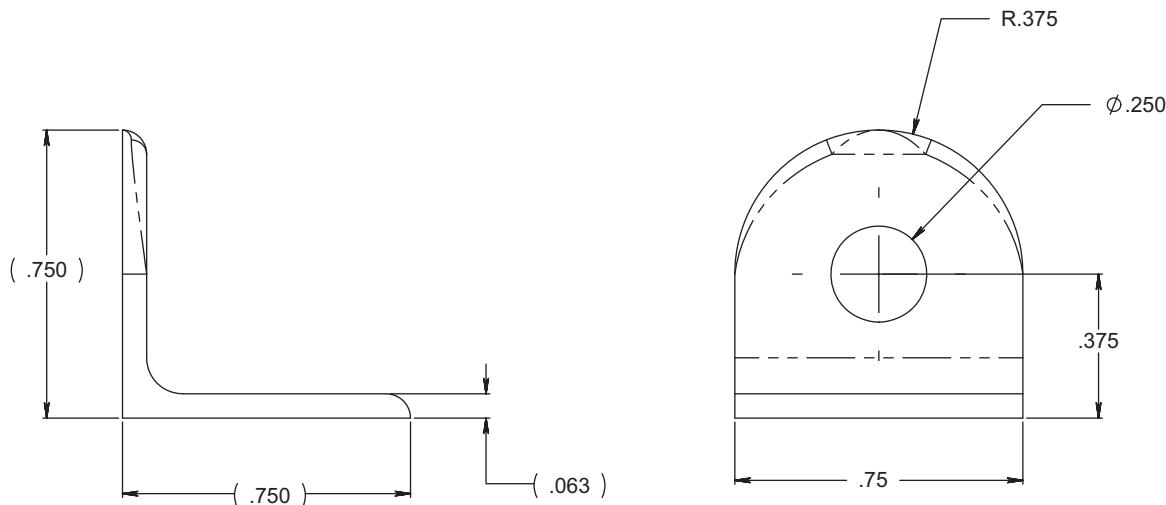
Bluetooth Antenna Mounting Bracket Example
